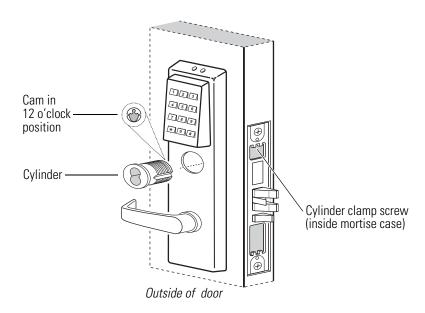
Removing and reinstalling the Keypad EZ cylinder
